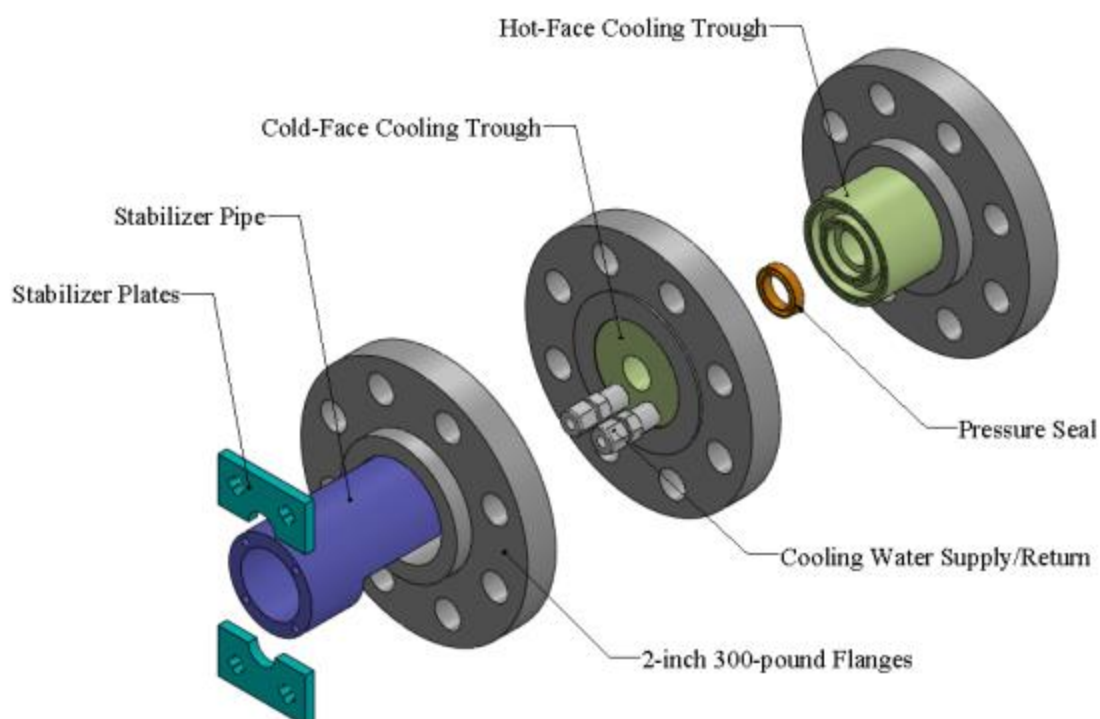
Exploded view of flange assembly and components. Stabilizer plates (aqua), stabilizer pipe (dark blue), cooling troughs (vomit), pressure seal (orange), and cooling water attachments.
